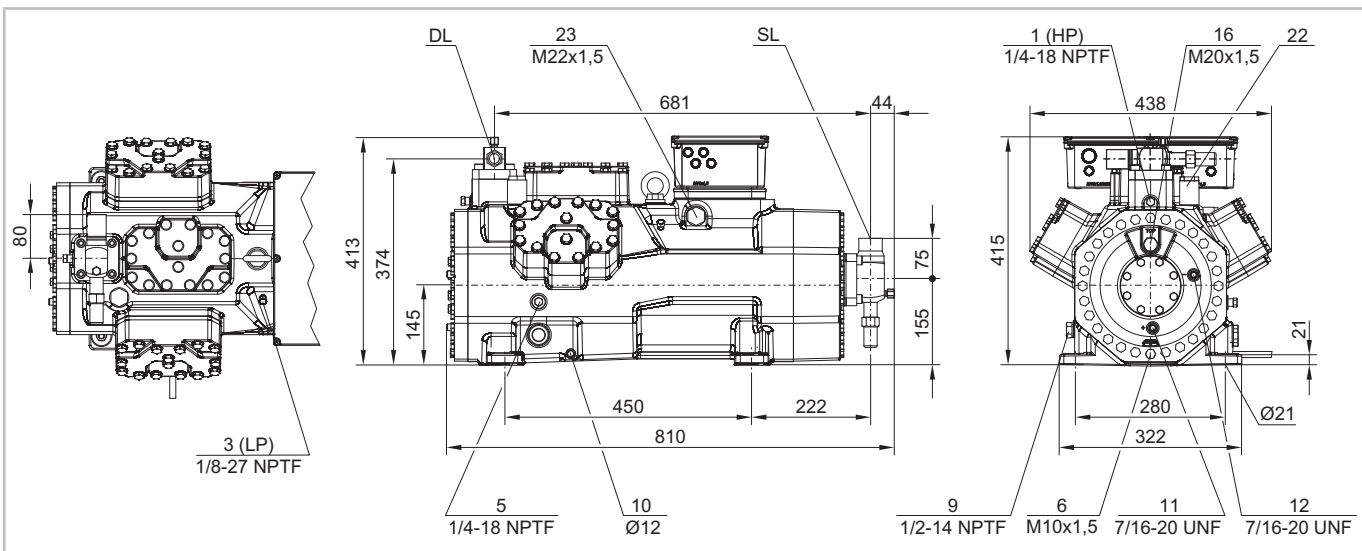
Dimensional drawing 6FTE-35(L)K .. 6CTE-50(L)K
